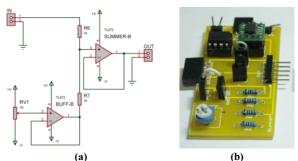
DC offset remover circuit: (a) Circuit schematic; (b) PCB implementation (33.32 mm x 62.56 mm)
